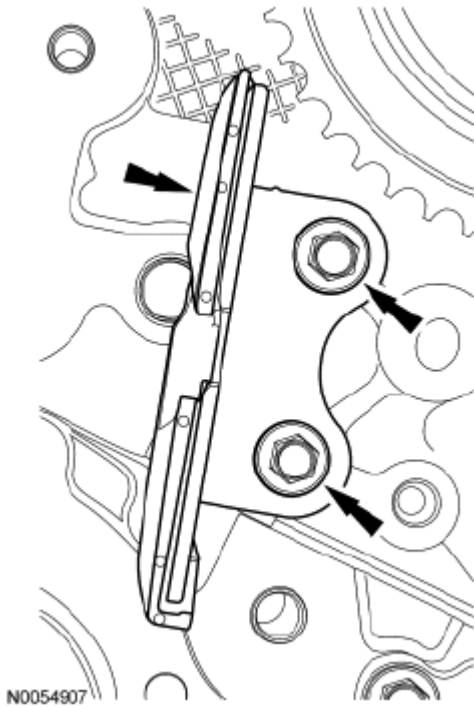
Locating Upper LH Primary Timing Chain Guide And Mounting Bolts
